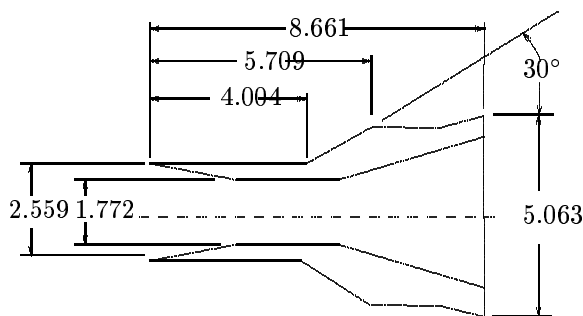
Hollow cylinder with short flare (dimensions in inches)
